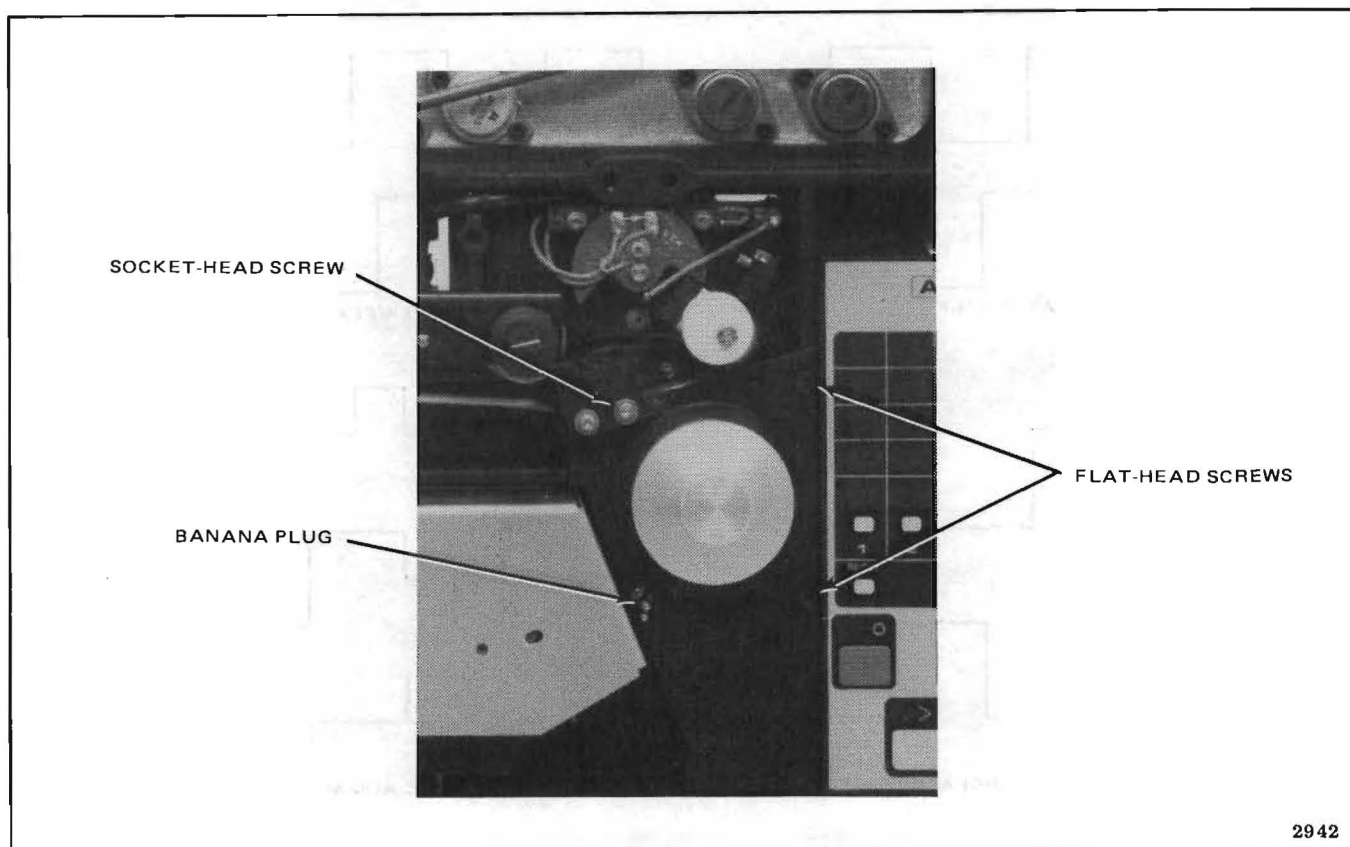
Front and Rear Tach, Cover Panel Removal
